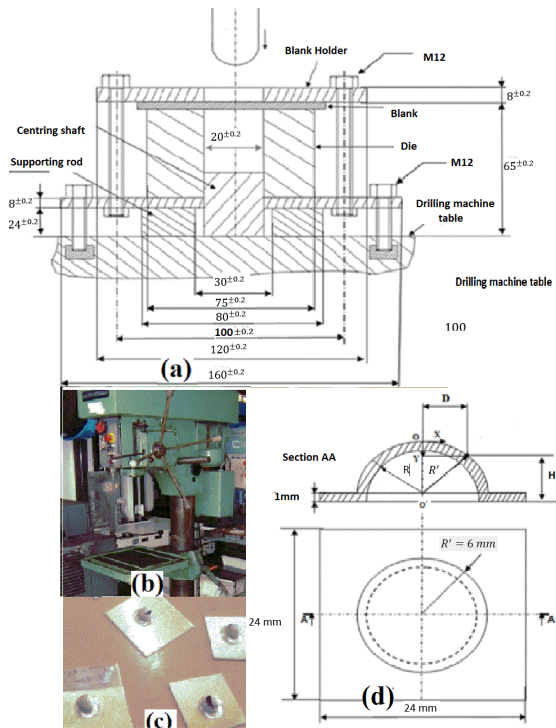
(a) Sheet metal domes drawing apparatus (b)Drilling machine (c) Manufactured parts (d) Reference part dimensions
